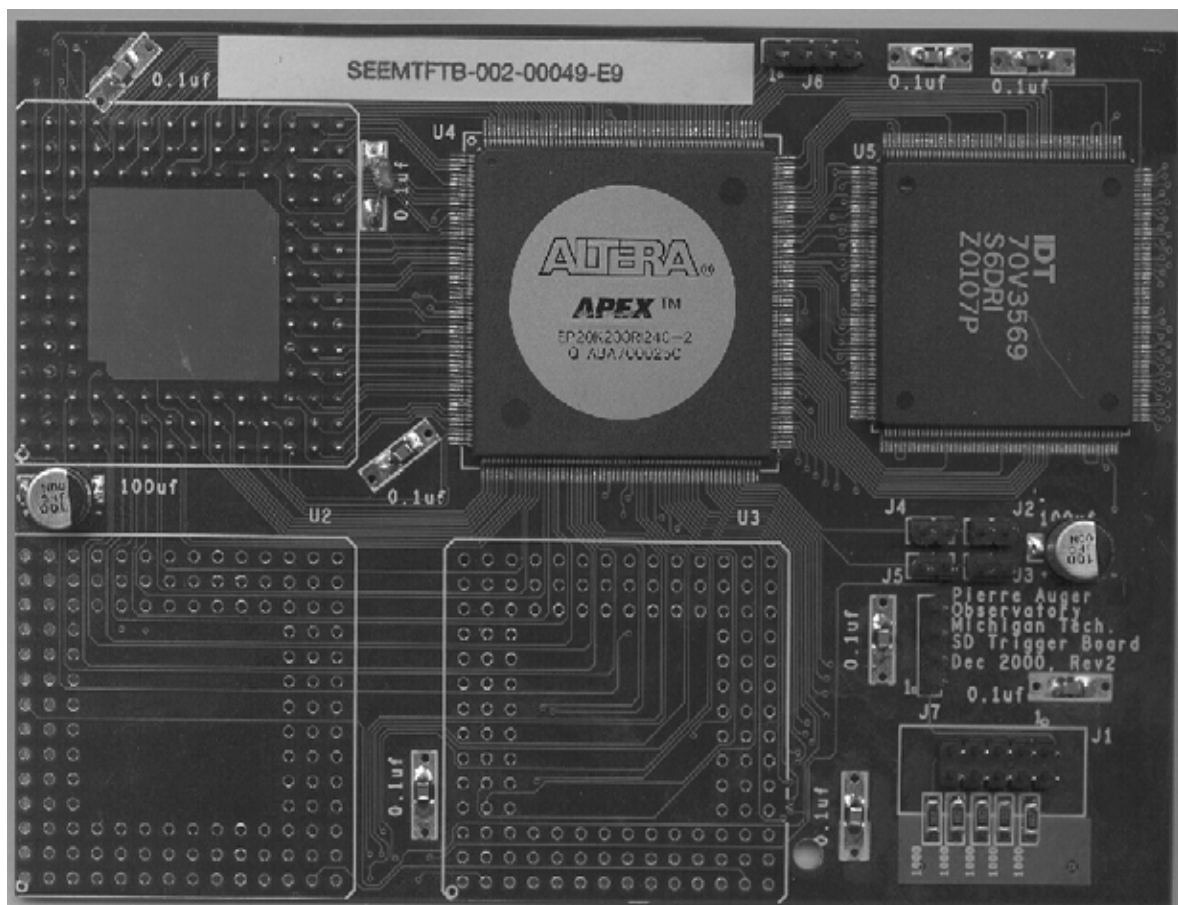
The view of the APEX trigger board. In the upper left corner there is a plug in to connect “daughter” trigger board with the Front End board via PGA132 socket. On two empty places for PGA132 packages may have been assembled ASICs. A connector to the PLD external programmer is located on right down corner.
